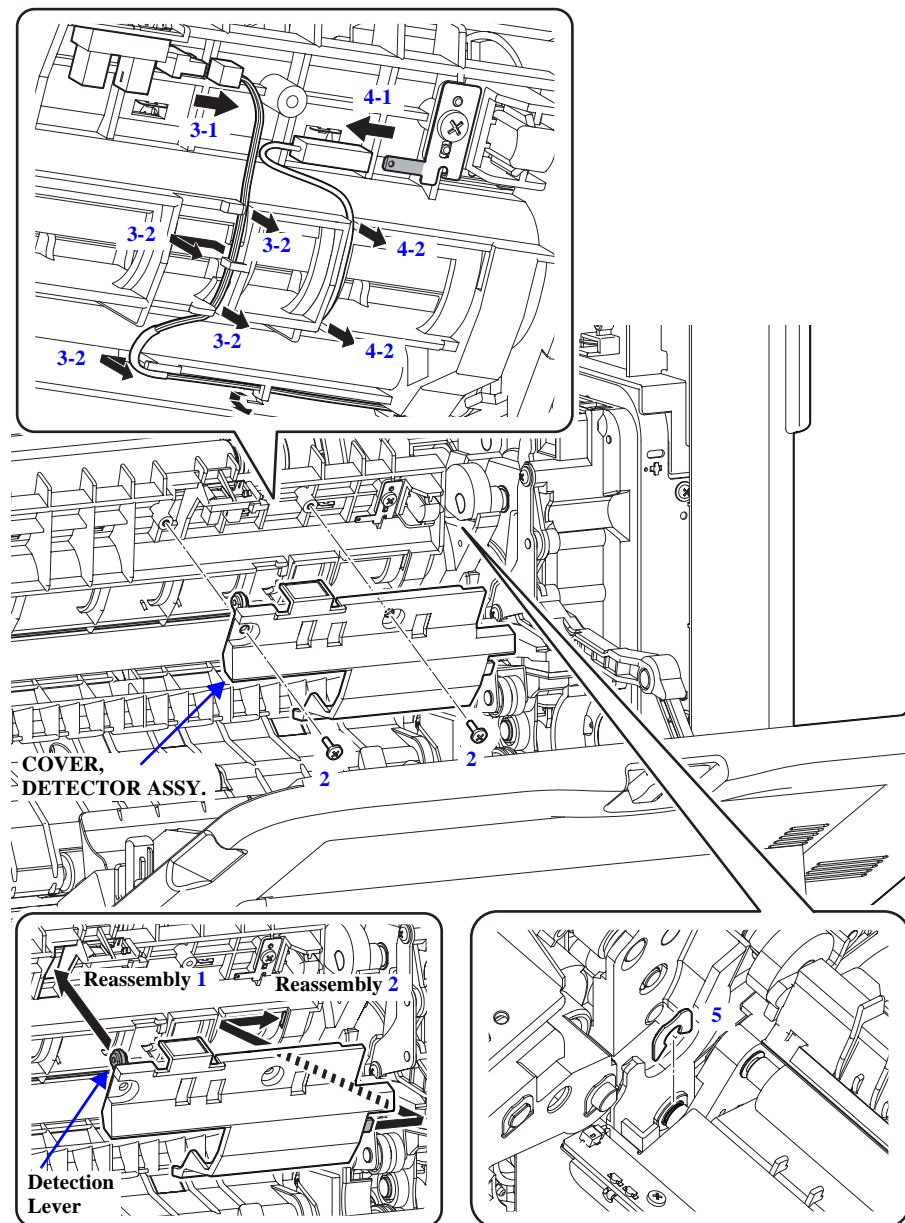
Removal of 2ND TRANSFER Assy., ASP 1
